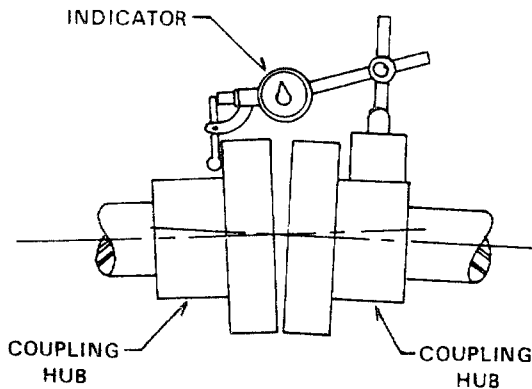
TESTING ANGULAR ALIGNMENT OF MOTOR AND GENERATOR SHAFTS
